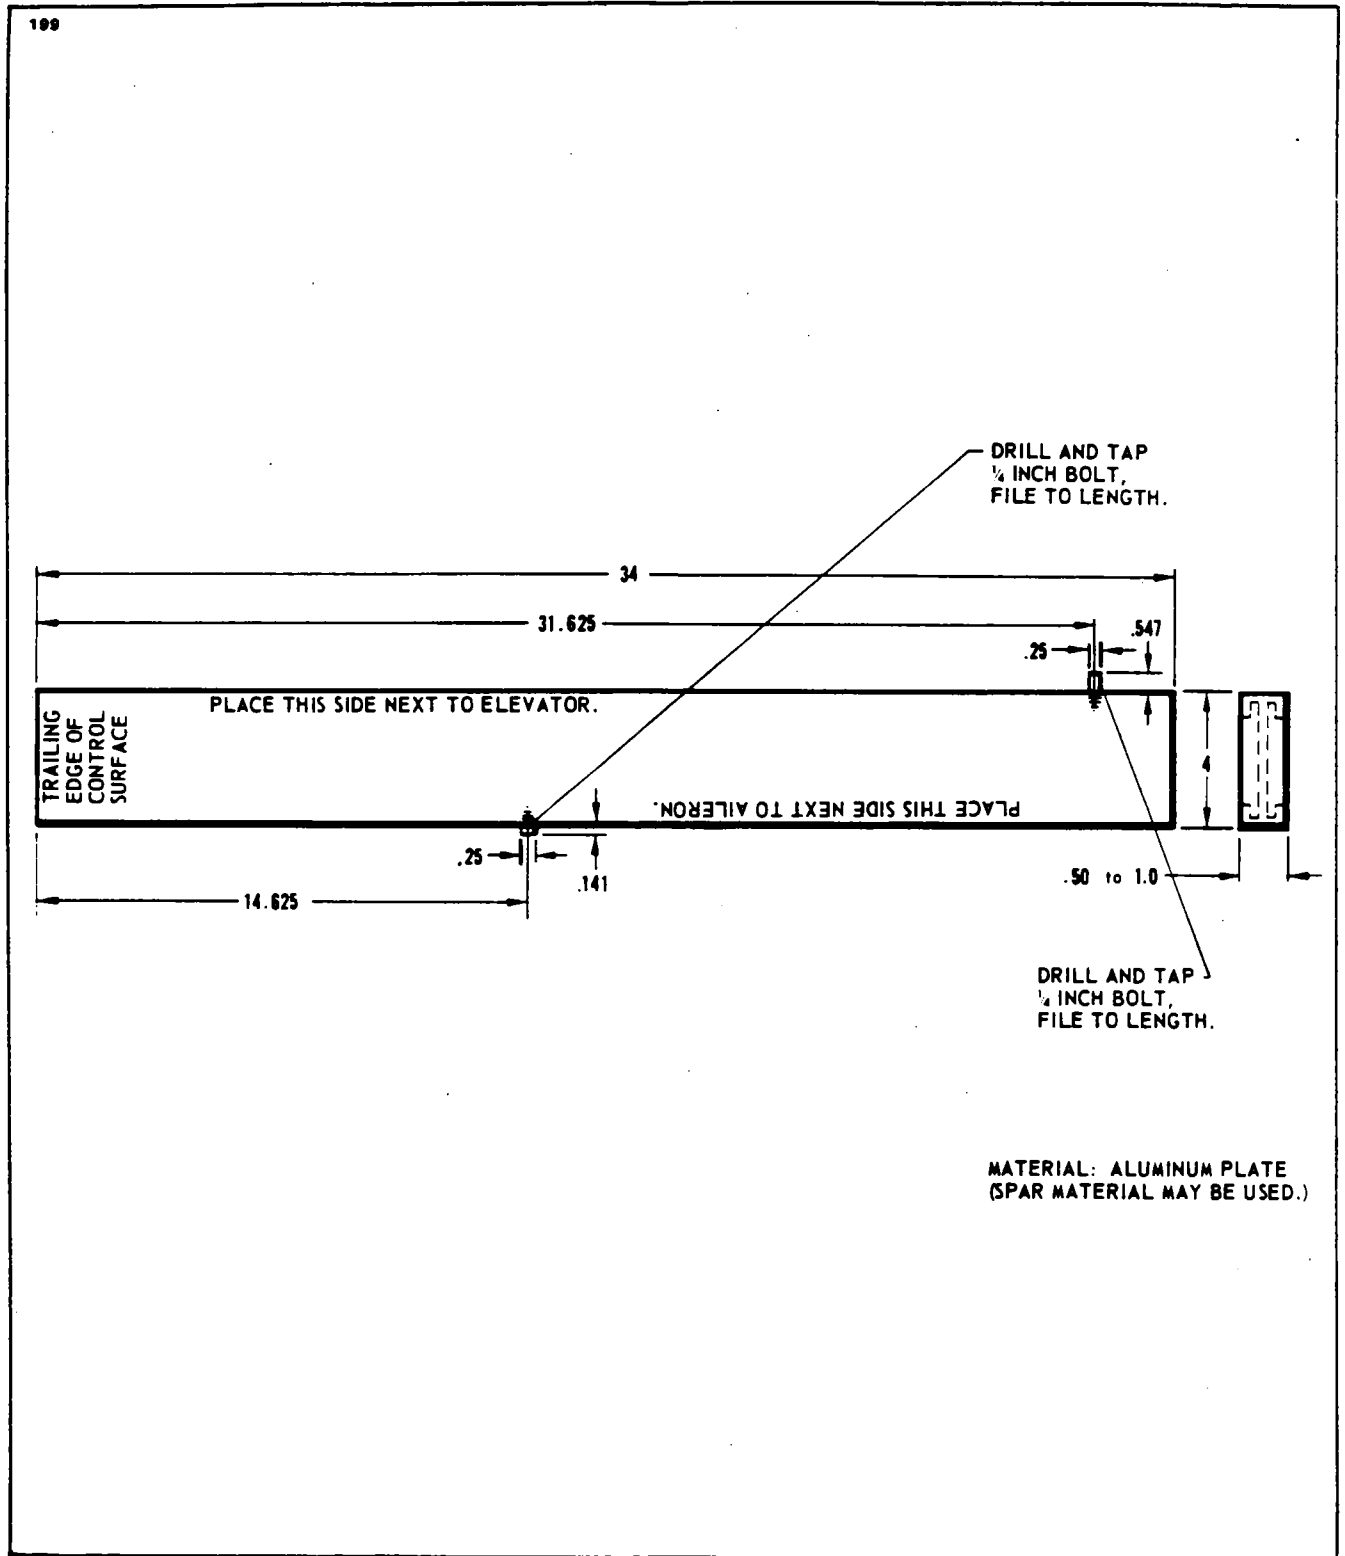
Fabricated Aileron and Elevator Rigging Tool
